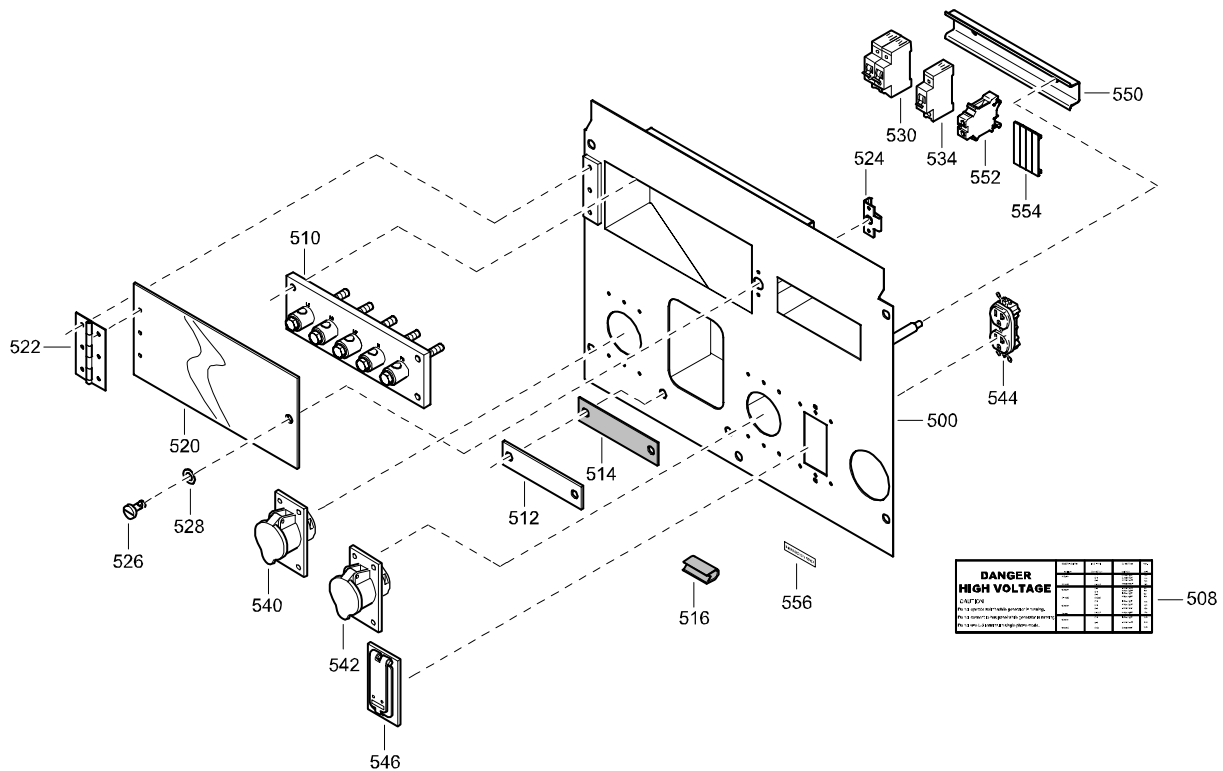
PLATE ASSEMBLY AUTOMATIC VOLTAGE REGULATOR
